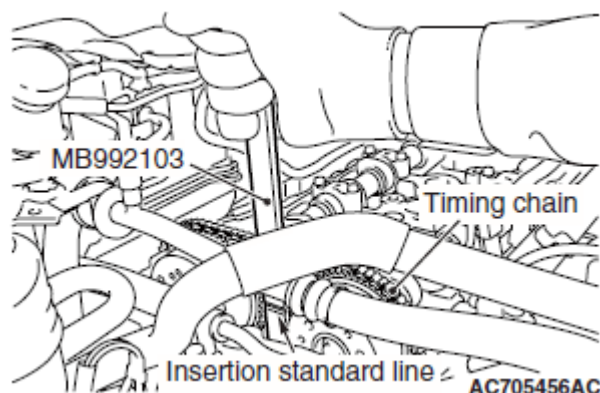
Inserting Timing Chain Case Assembly Using Special Tool MB992103
